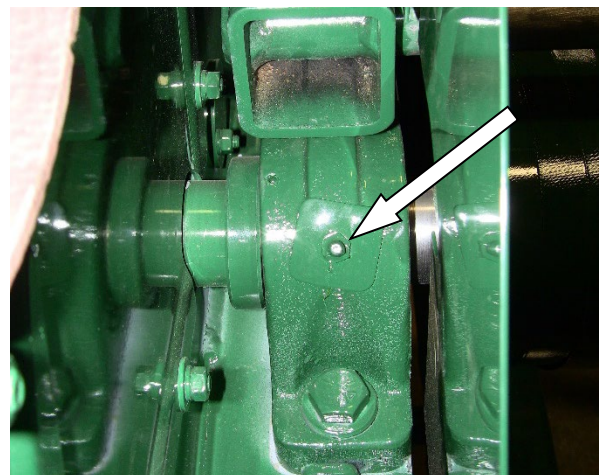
Front Cylinder Shaft Bearing (See Arrow) (Shields Removed for Clarity).
